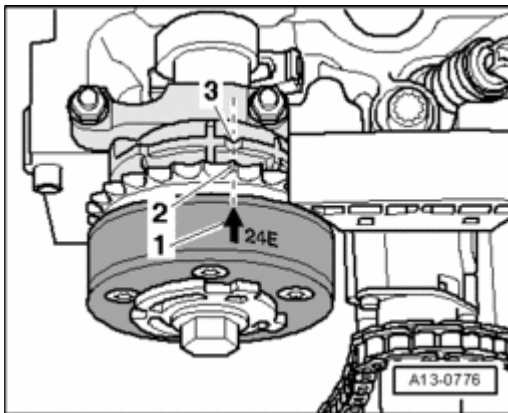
Tighten Camshaft Adjuster (Intake Side) To Intake Camshaft Finger-Tight
